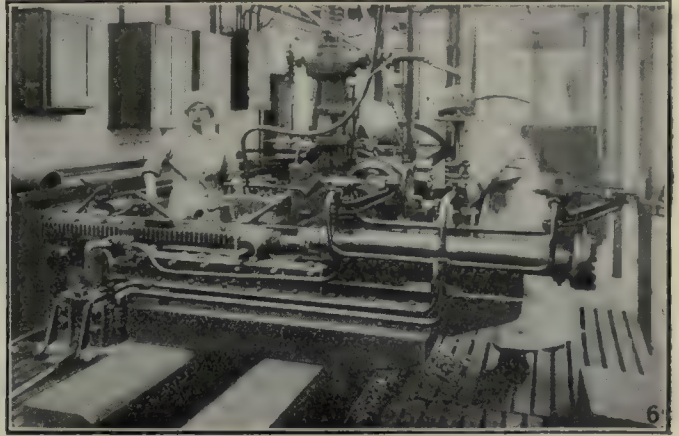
FINISHING BASE, THREADING AND GROOVING
